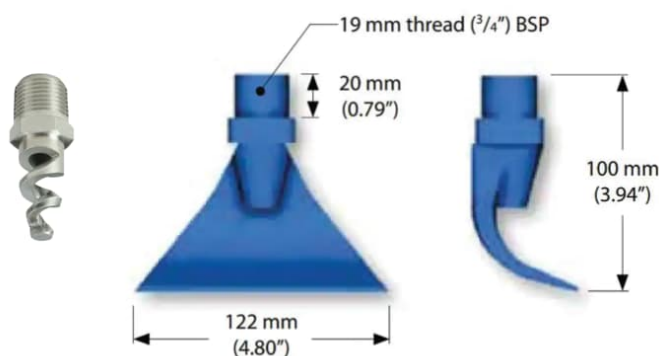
Spiral Nozzle and Cobra Head Nozzle
